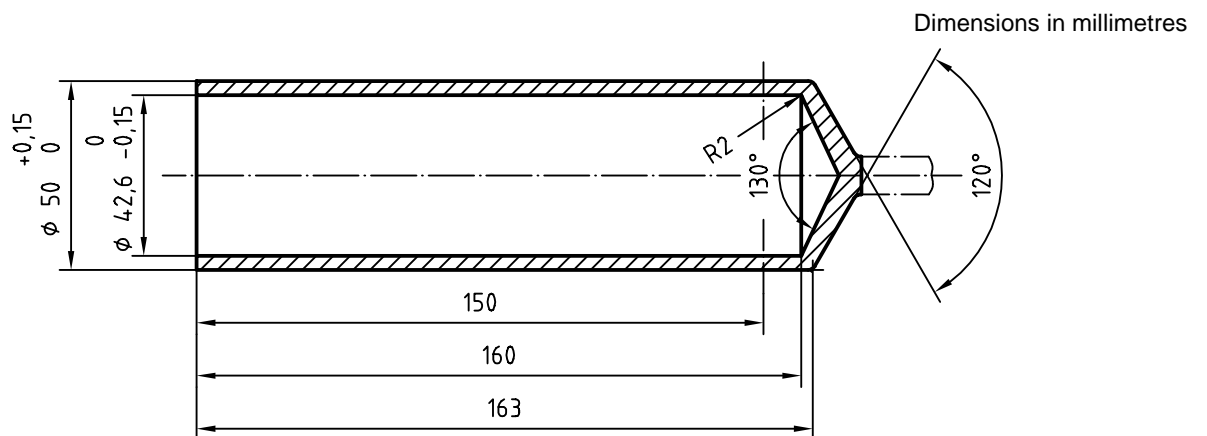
Injection-moulded test piece ($d_n = 50$, pipe series S6,3)
